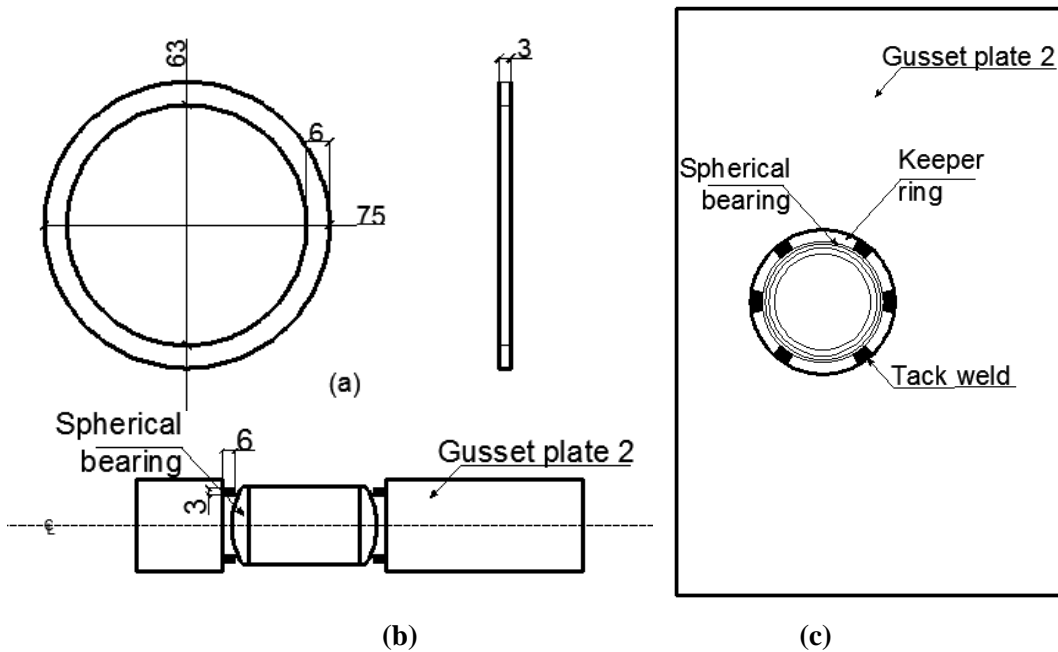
(a) Keeper ring dimensions (units: mm); (b) Front view of gusset plate-2 with spherical bearing and keeper ring; (c) Section view of gusset plate-2 with spherical bearing and keeper ring (units: mm)
